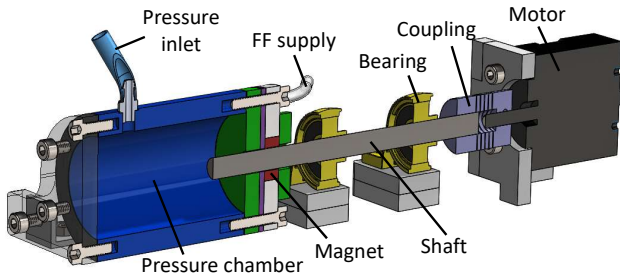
This figure presents a cut through of the test setup. The seal module is mounted on a pressure chamber which simulates the sealing environment. A DC motor drives the ferromagnetic shaft supported by two ball bearings.
